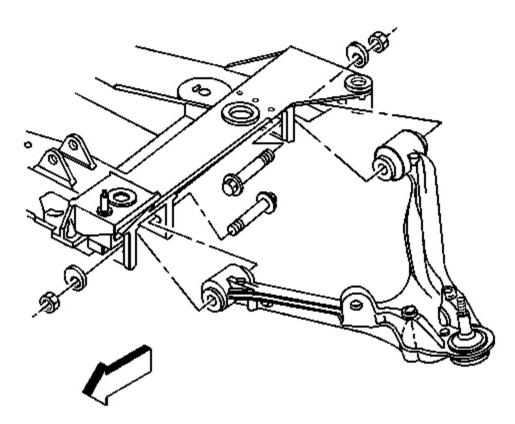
Lower Control Arm & Bolts Courtesy of GENERAL MOTORS CORP.
